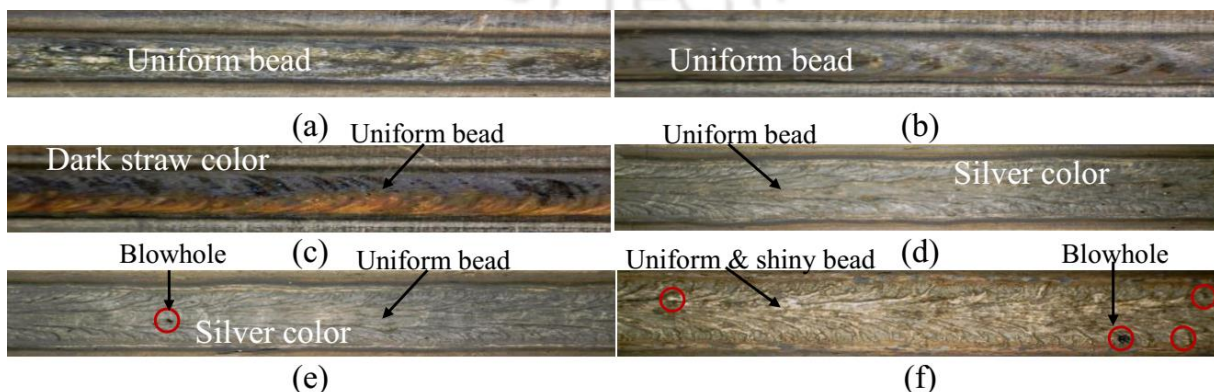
Weld bead appearance of top surface of welded specimens for Exp. No. (a) 1, (b) 2, (c) 3, (d) 4, (e) 5 and (f) 6 in Table 5.3
